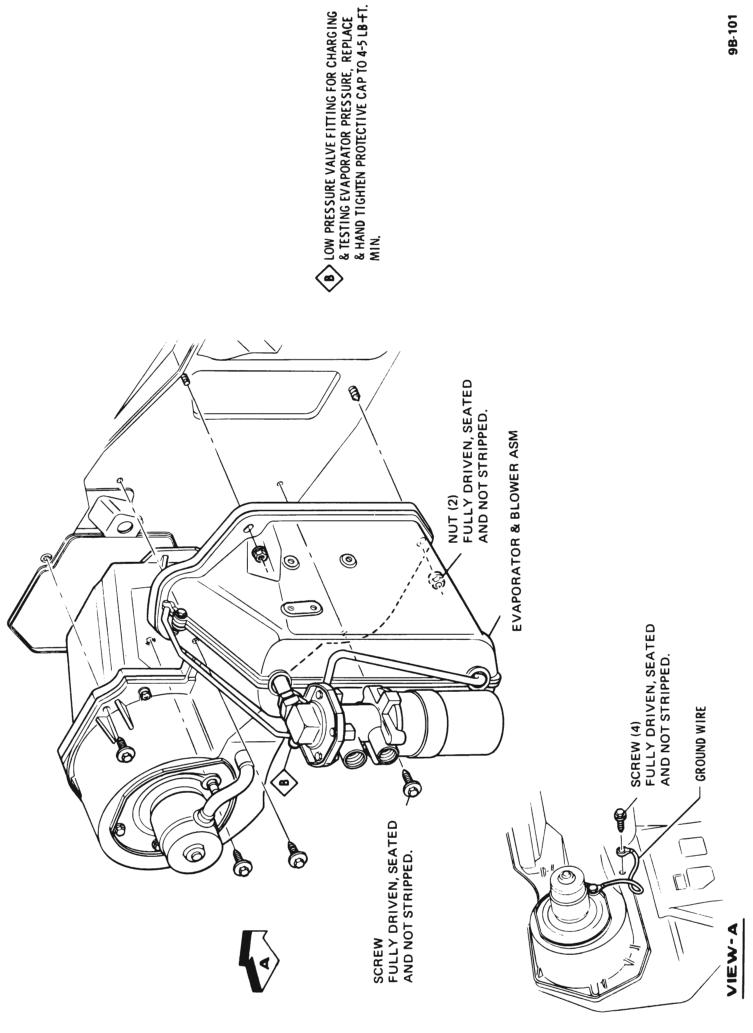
B-117 Evaporator and Blower Assembly - B-C-E Series
